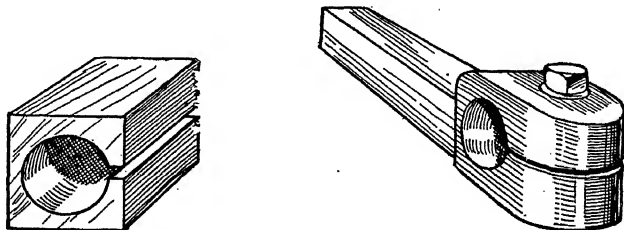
Alternative methods of holding the head portion of the flexible shaft in the tool holder.
